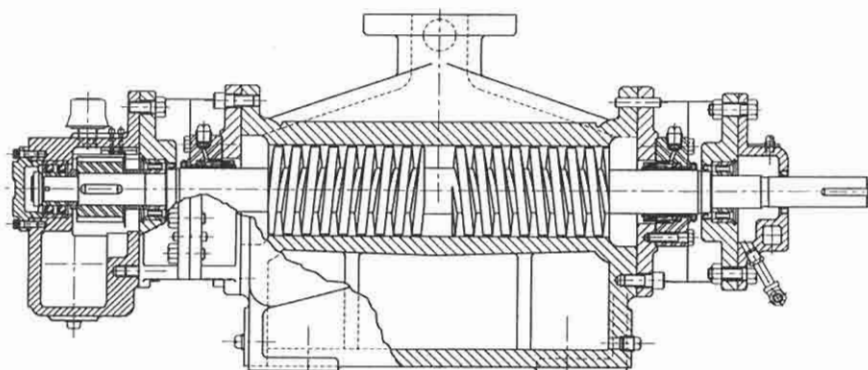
A twin-screw multiphase pump (courtesy of Ingersoll-Dresser Pumps).
